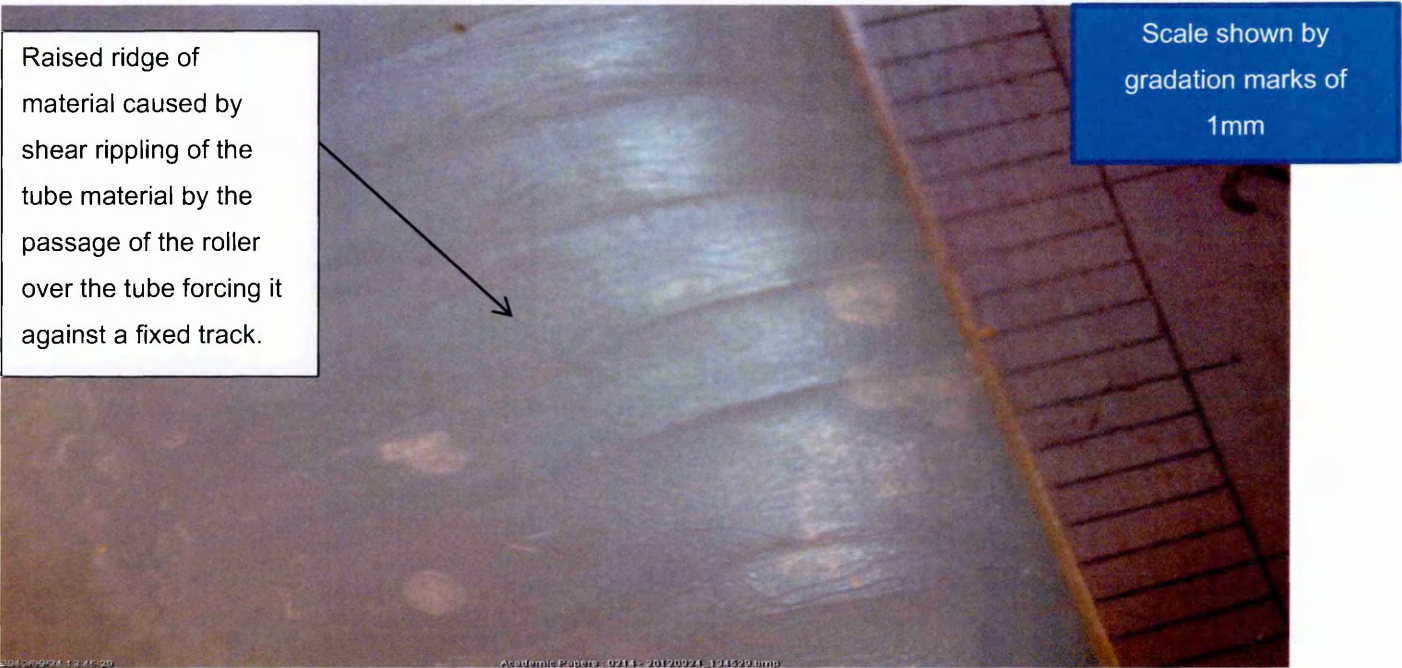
Shear damage caused by roller interaction with the surface on a silicone rubber tube
